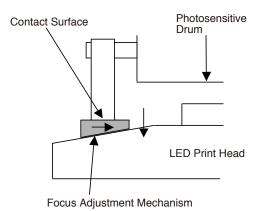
Wedge-Shaped Focus Adjustment Mechanism
